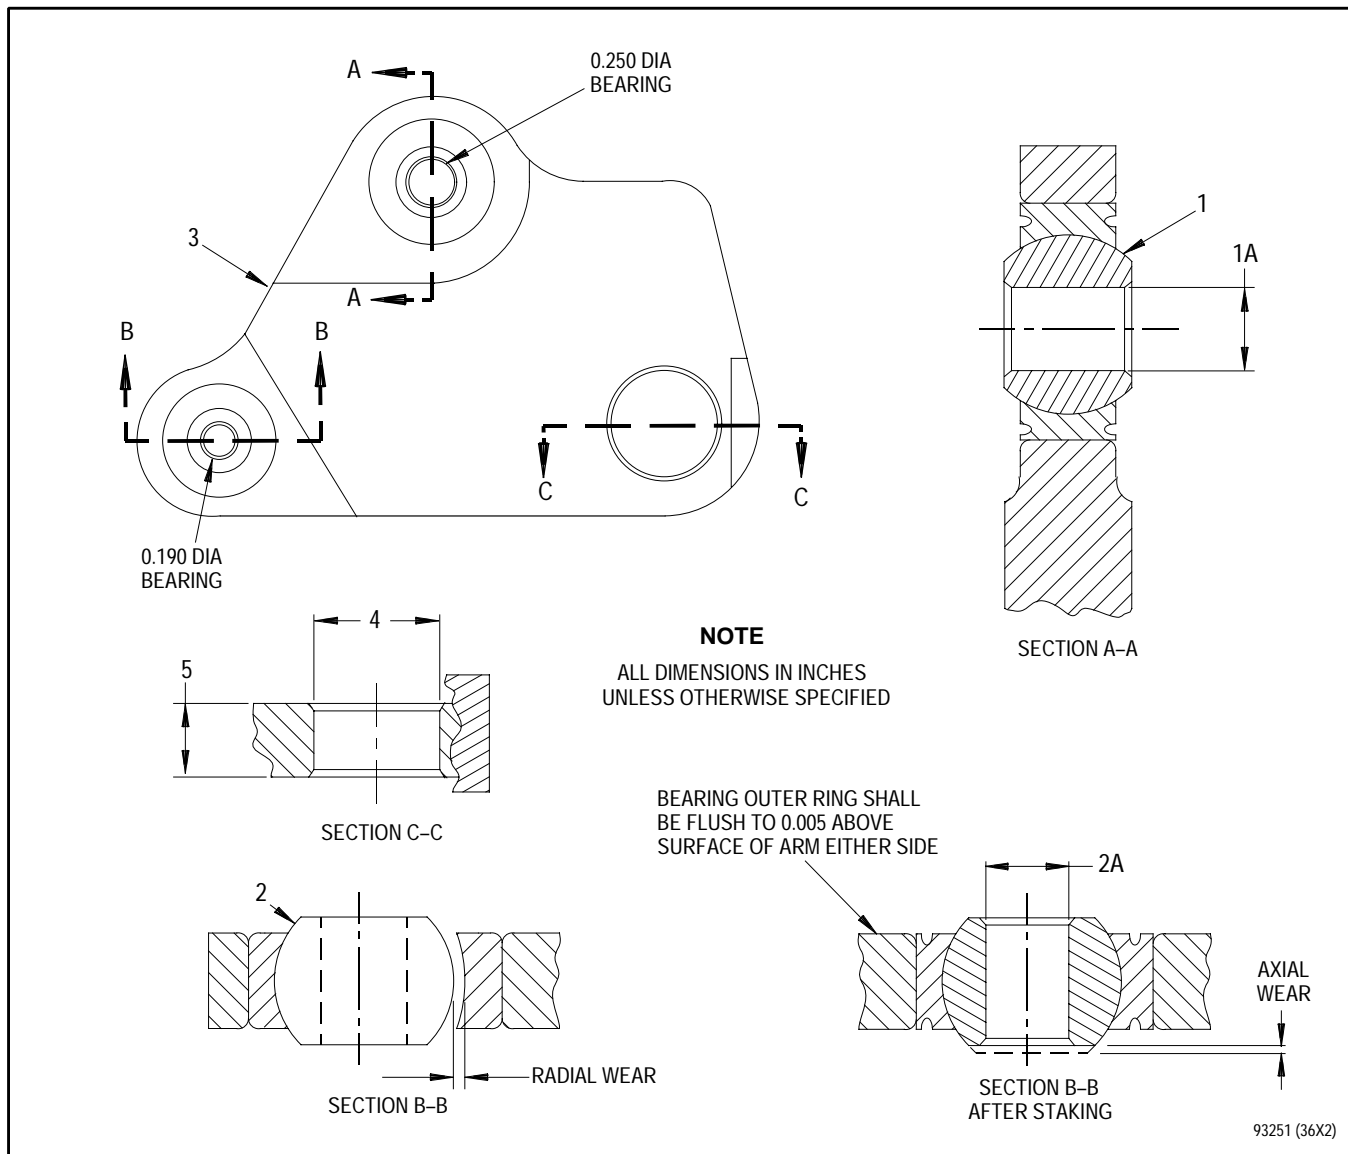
Compressor Stator Linkage Bellcrank Assembly - Inspection
